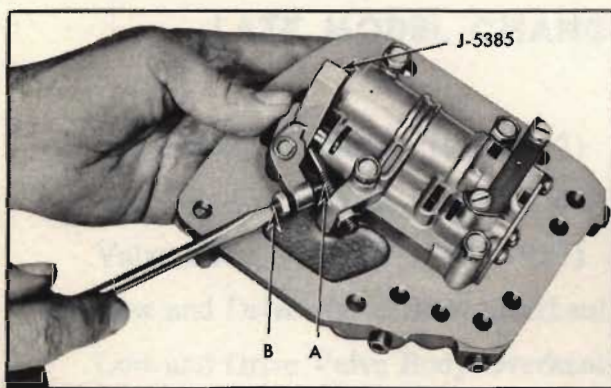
Setting (2) of throttle valve inner lever adjustment
